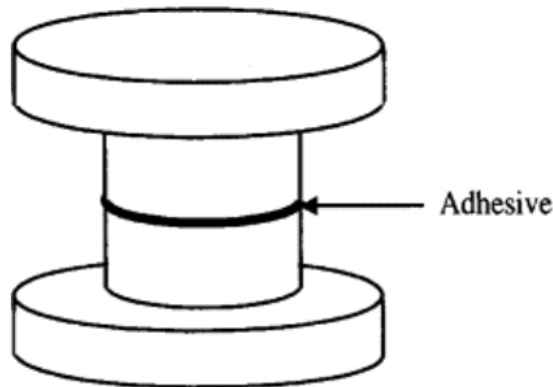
Another example of how a butt joint might look, this specific configuration is well suited to be used in a tensile testing machine.[22]
